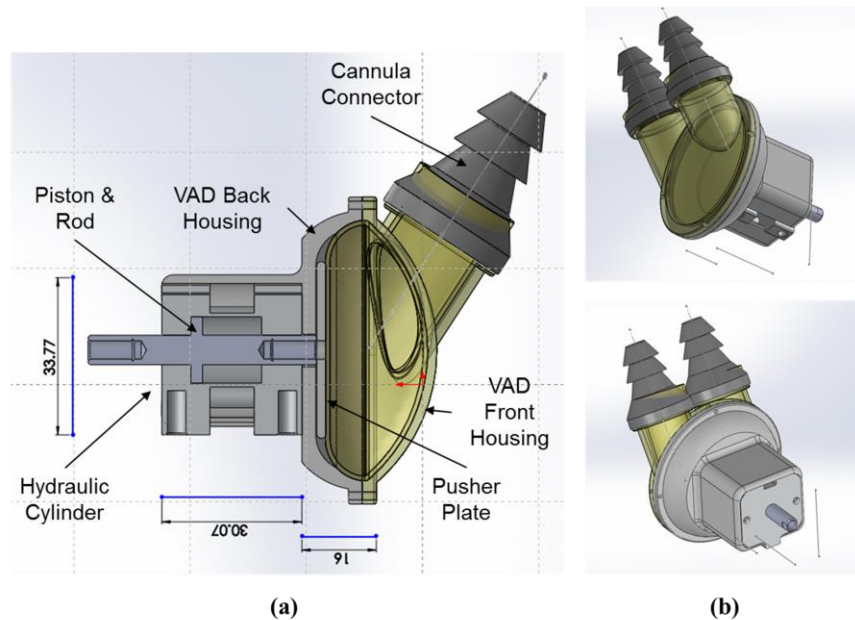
(a) Side view of computer aided design of UCLA 25mL Pediatric PiezoVAD and (b) isometric front and back views
